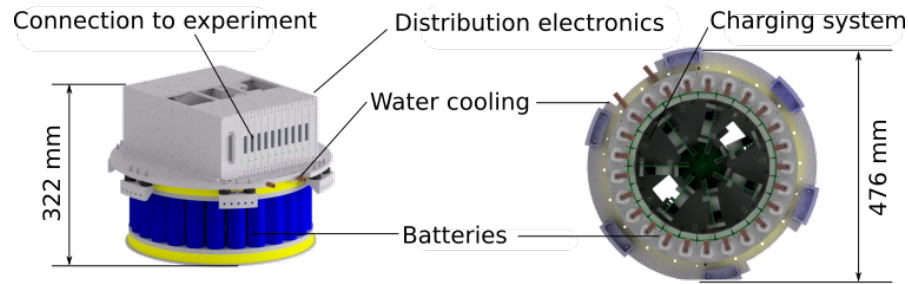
CAD-drawing of the MAIUS-1 battery module. LHS: side view, RHS: Bottom view. The bottom housing is not shown.
